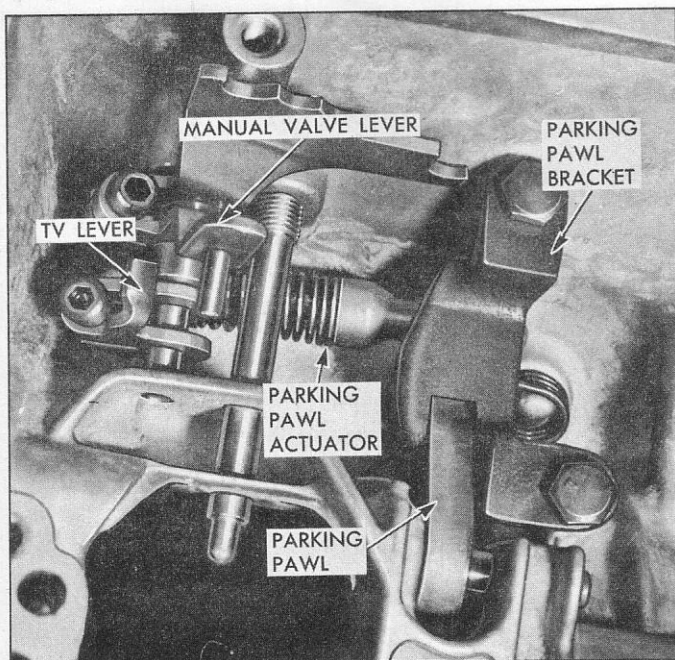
Inner Control Levers, Parking Pawl and Bracket
